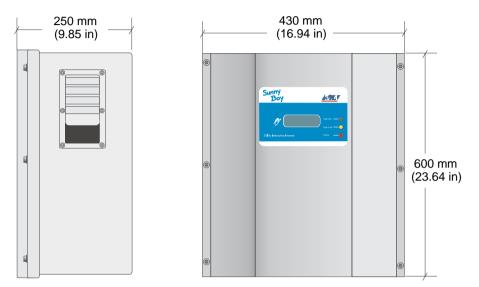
Outer Dimensions of the Sunny Boy 6000U
